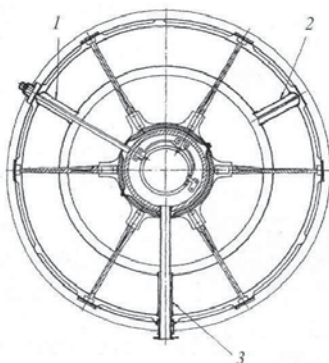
Cross-section of the support housing of the D050 engine [15]:
